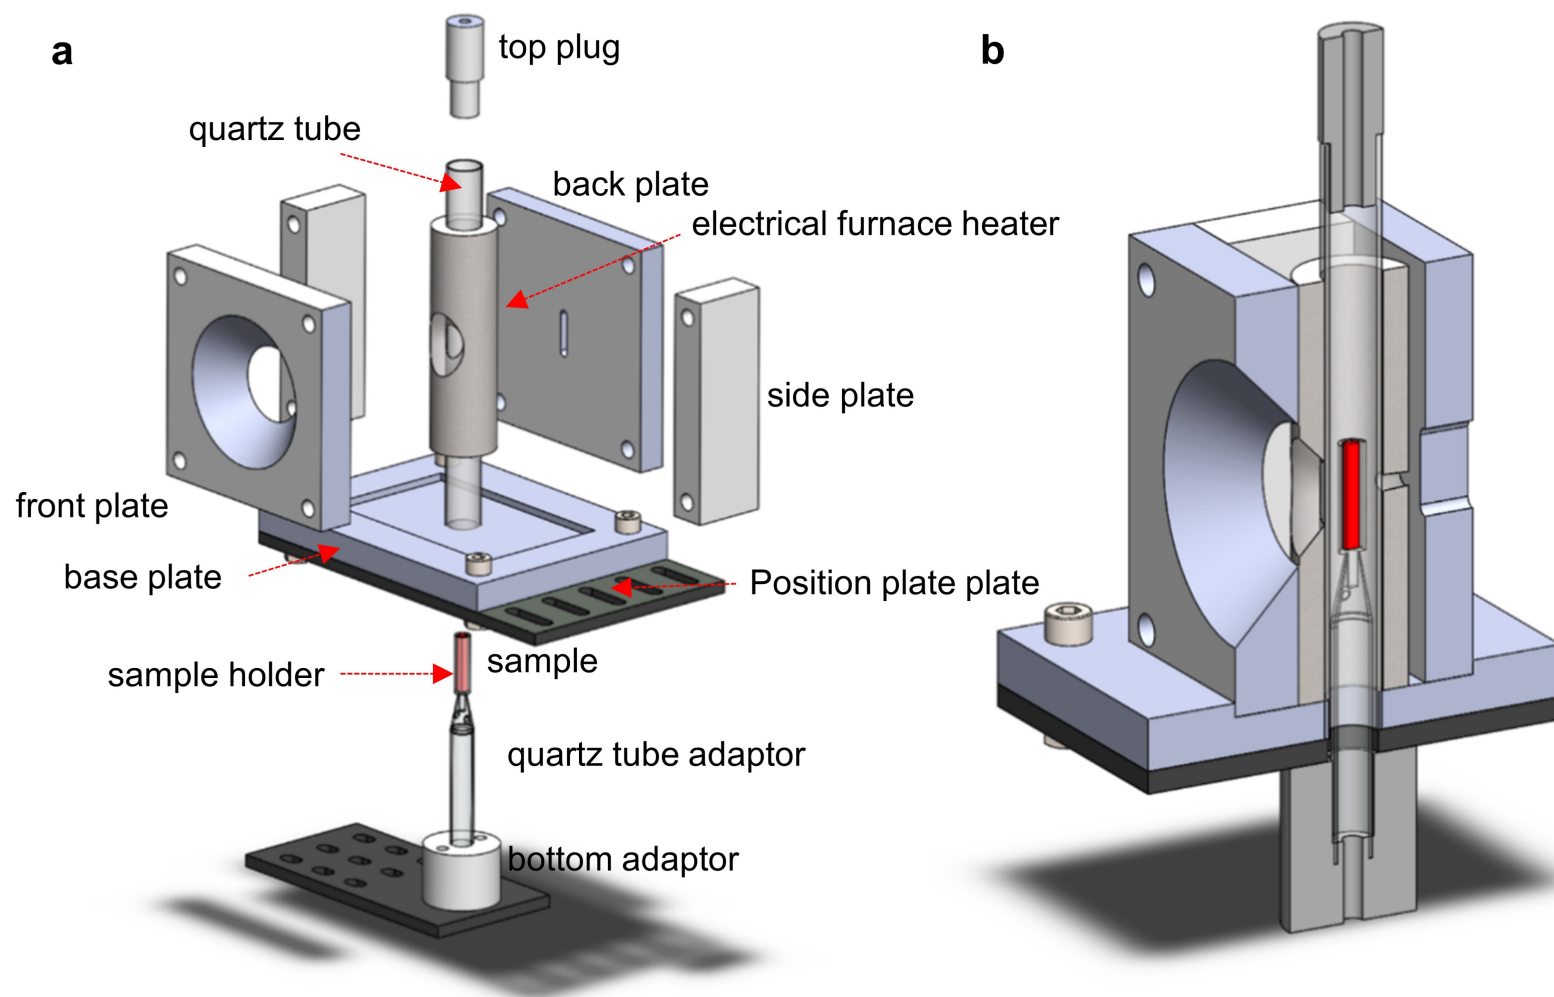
(a) The CAD assemblies and (b) the centre-line sectional view of the experimental apparatus for the SXTS at I15-1.
